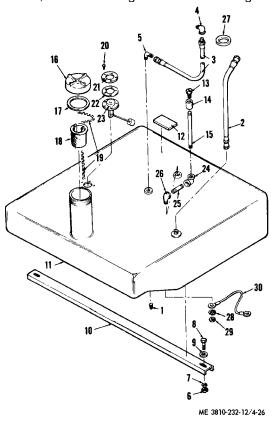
Crane fuel tank, lines and fittings, disassembly and reassembly.
